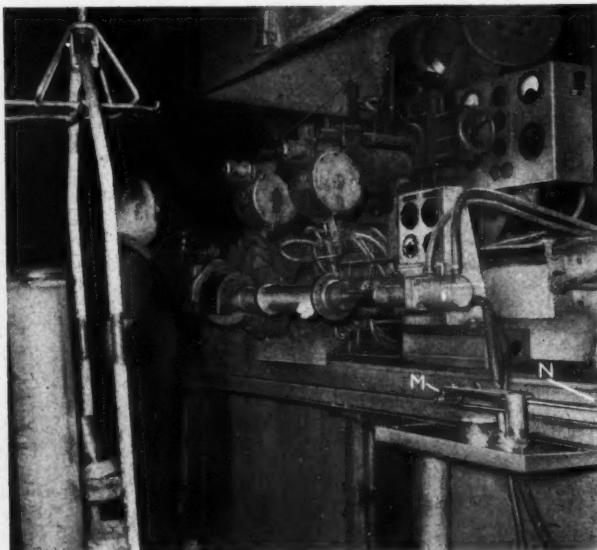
At this set-up for  $\text{CO}_2$  welding the piston-heads to the inner tubes, location is facilitated by the trolley fixture *M*. Each weld is completed in a cycle time of 16 sec.
